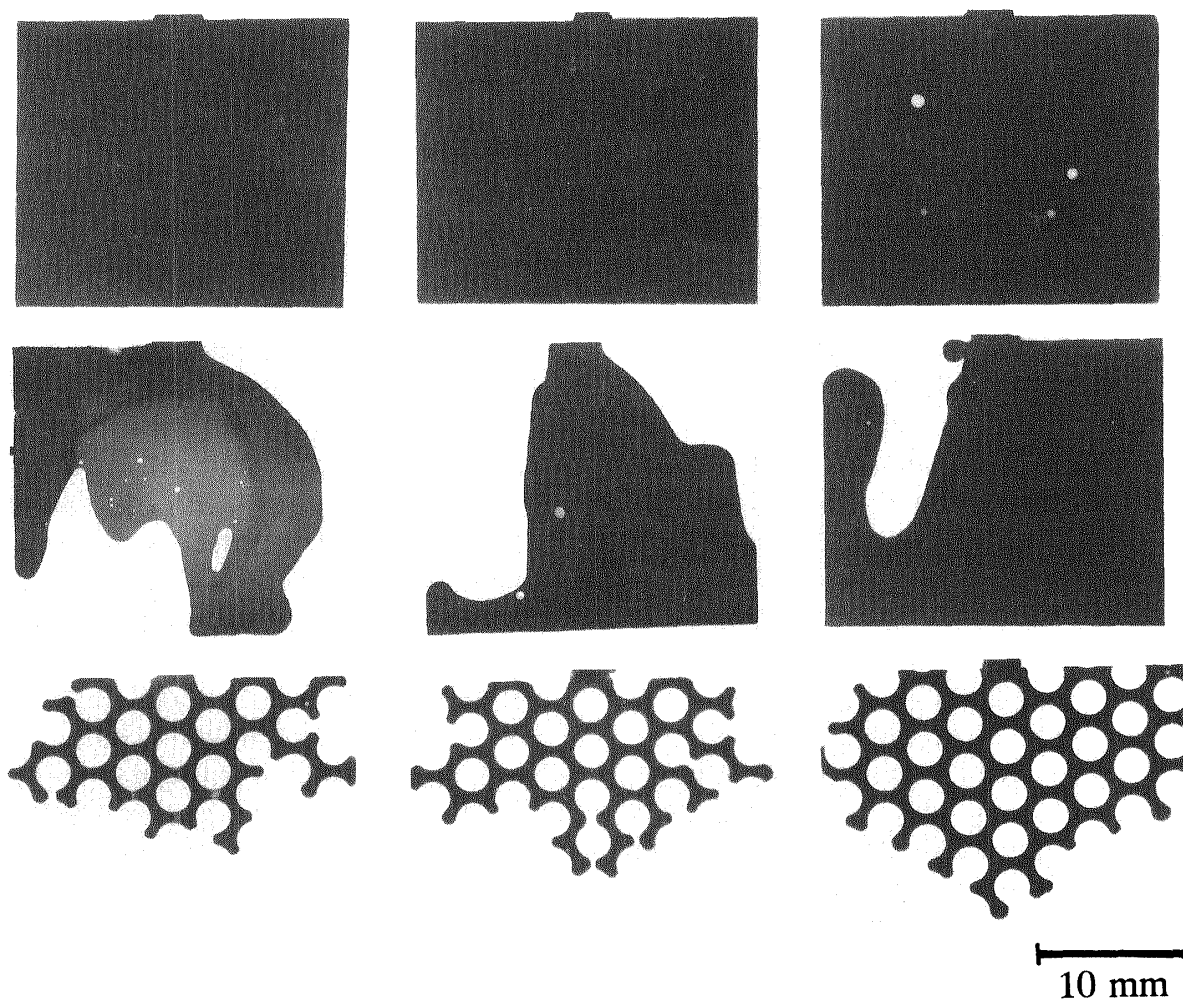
X-ray radiographs of three type castings of pure titanium ; thick plate castings (up), thin plate castings (middle) and grids castings (bottom)
